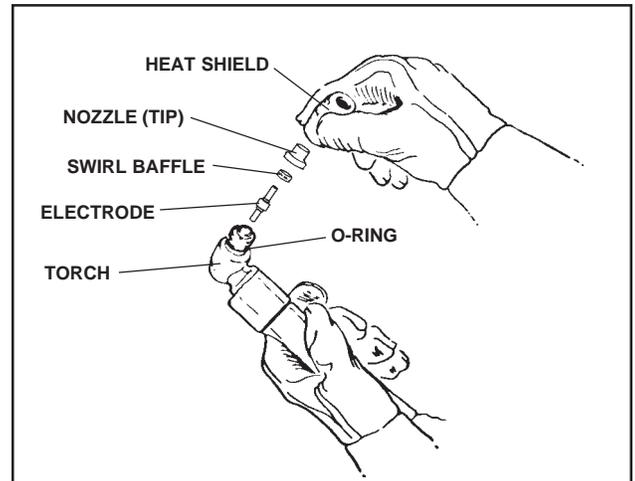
Assembly of PT-34 Torch Front End Parts
